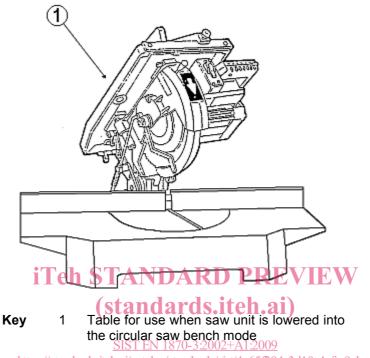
Example of a dual purpose down cutting cross-cut saw/circular saw bench
